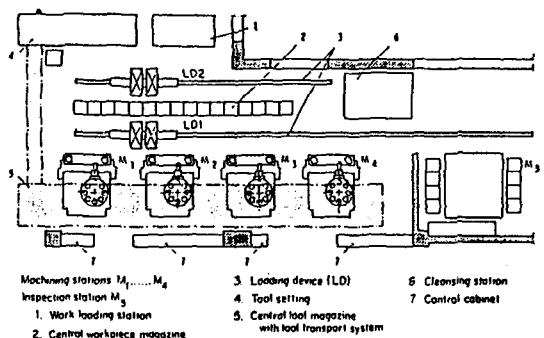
Flexible manufacturing system for non-circular parts at Stuttgart University Institute of Control Technology for Machine Tools and Production Installation
